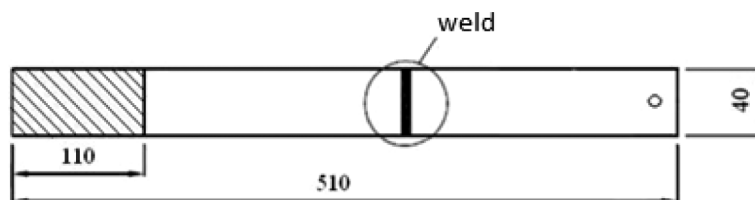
Illustration of the dimensions of the beam and the weld
